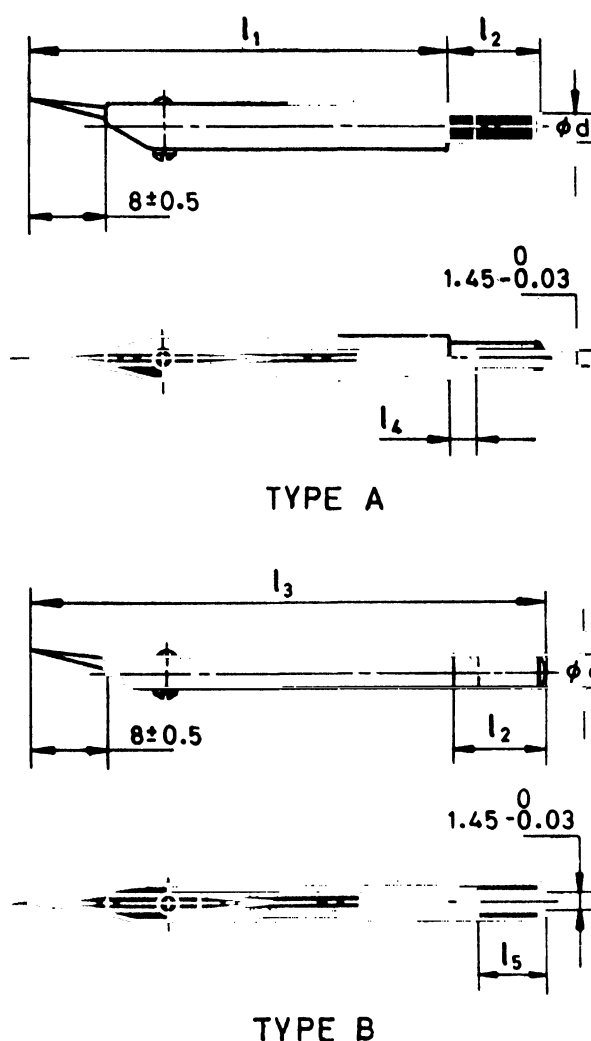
DIMENSIONS FOR NEEDLE POINTS
